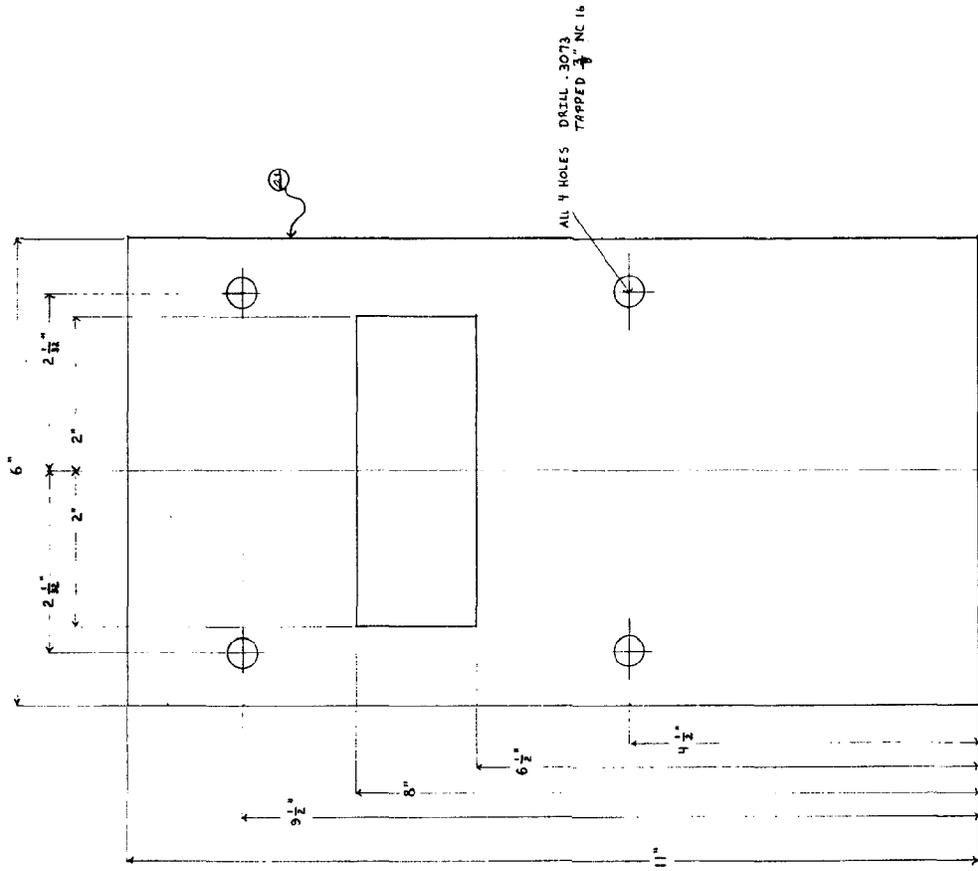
SEED OYSTER HARVESTER, MOTOR MOUNT AND CHAIN DRIVE ASSEMBLY.
